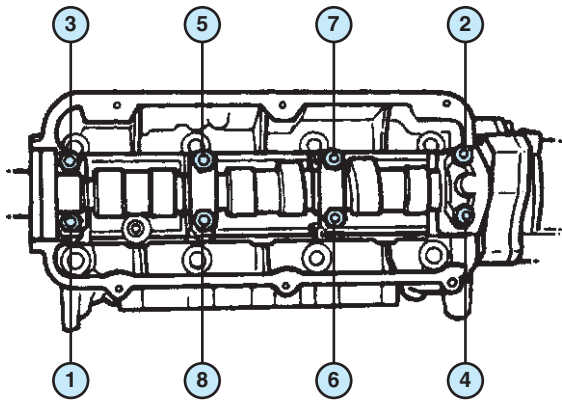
Always follow the specified loosening sequence to prevent valve spring tension from bending the camshaft.
